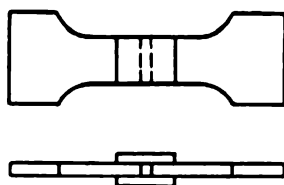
Sketch of a double lap-soldered test specimen for testing shear strength.
